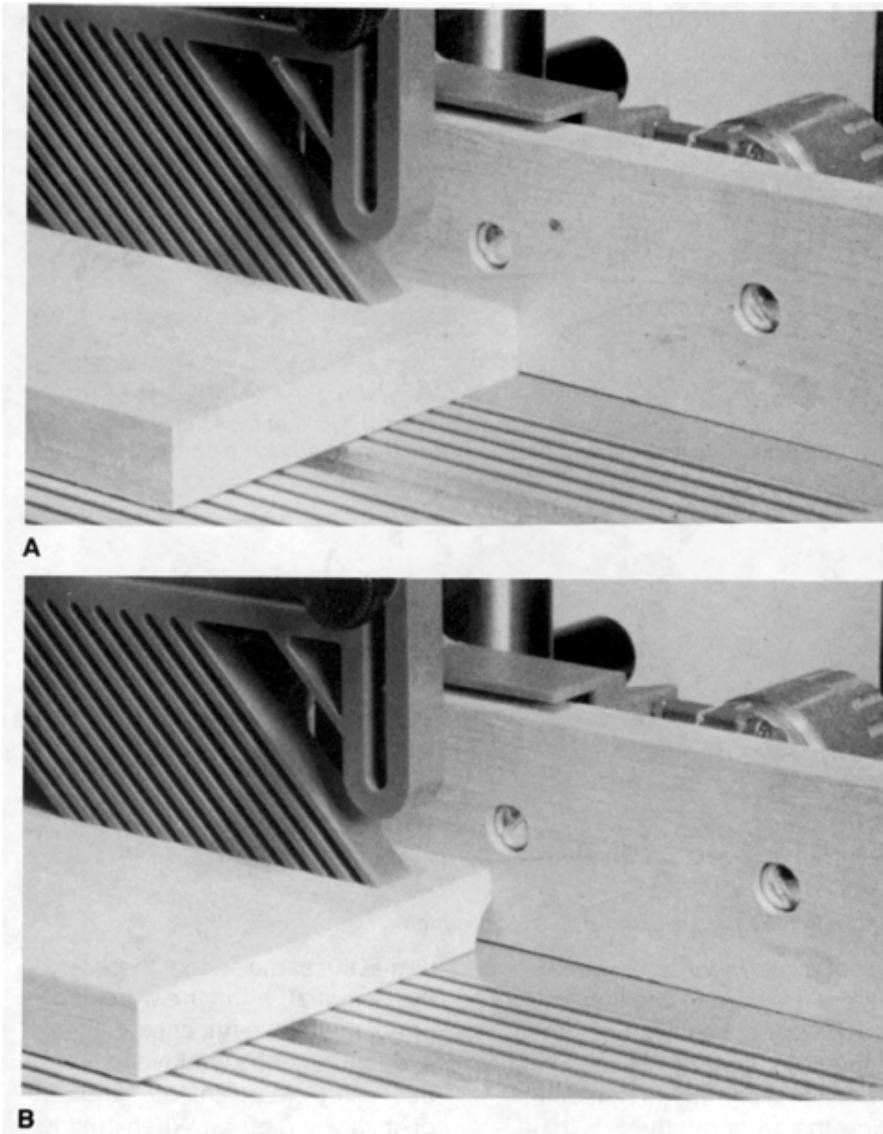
Combination cutters can do various jobs. (A) Here a quarter-round and cove cutter is used to round off the edge of a workpiece. (B) The same cutter is shown forming a cove.
